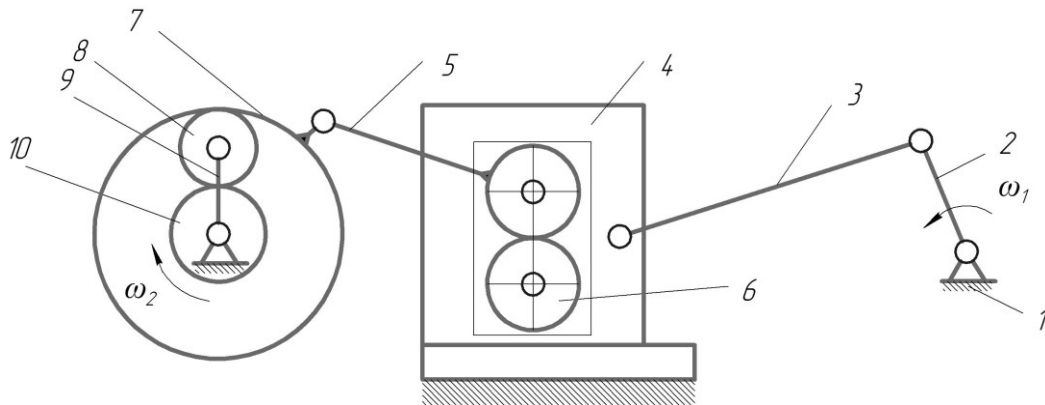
Roller drive mechanism with planetary gearbox: 1 - fixed frame; 2 - crank drive of the working stand; 3 - connecting rod; 4 - working stand; 5 - connecting rod, upper roller, gear wheel (one link); 6 - roller; 7, 8, 10 - gears; 9 - carrier.
